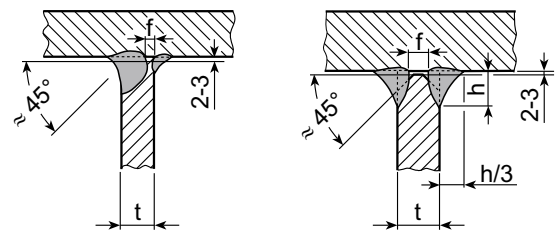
Single- and double-bevel welds with defined incomplete root penetration
